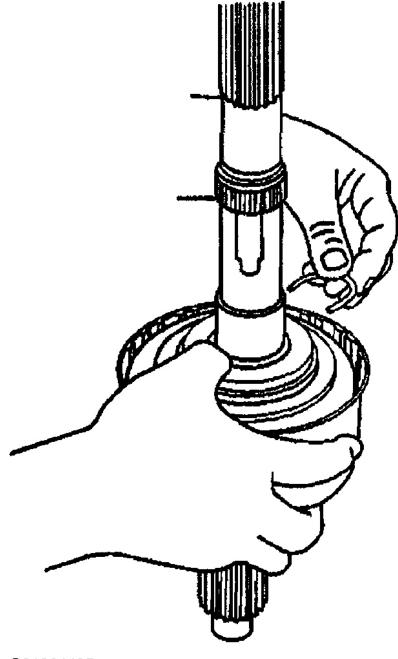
Aligning Markings On Clutch Pressure Plate Bearing
